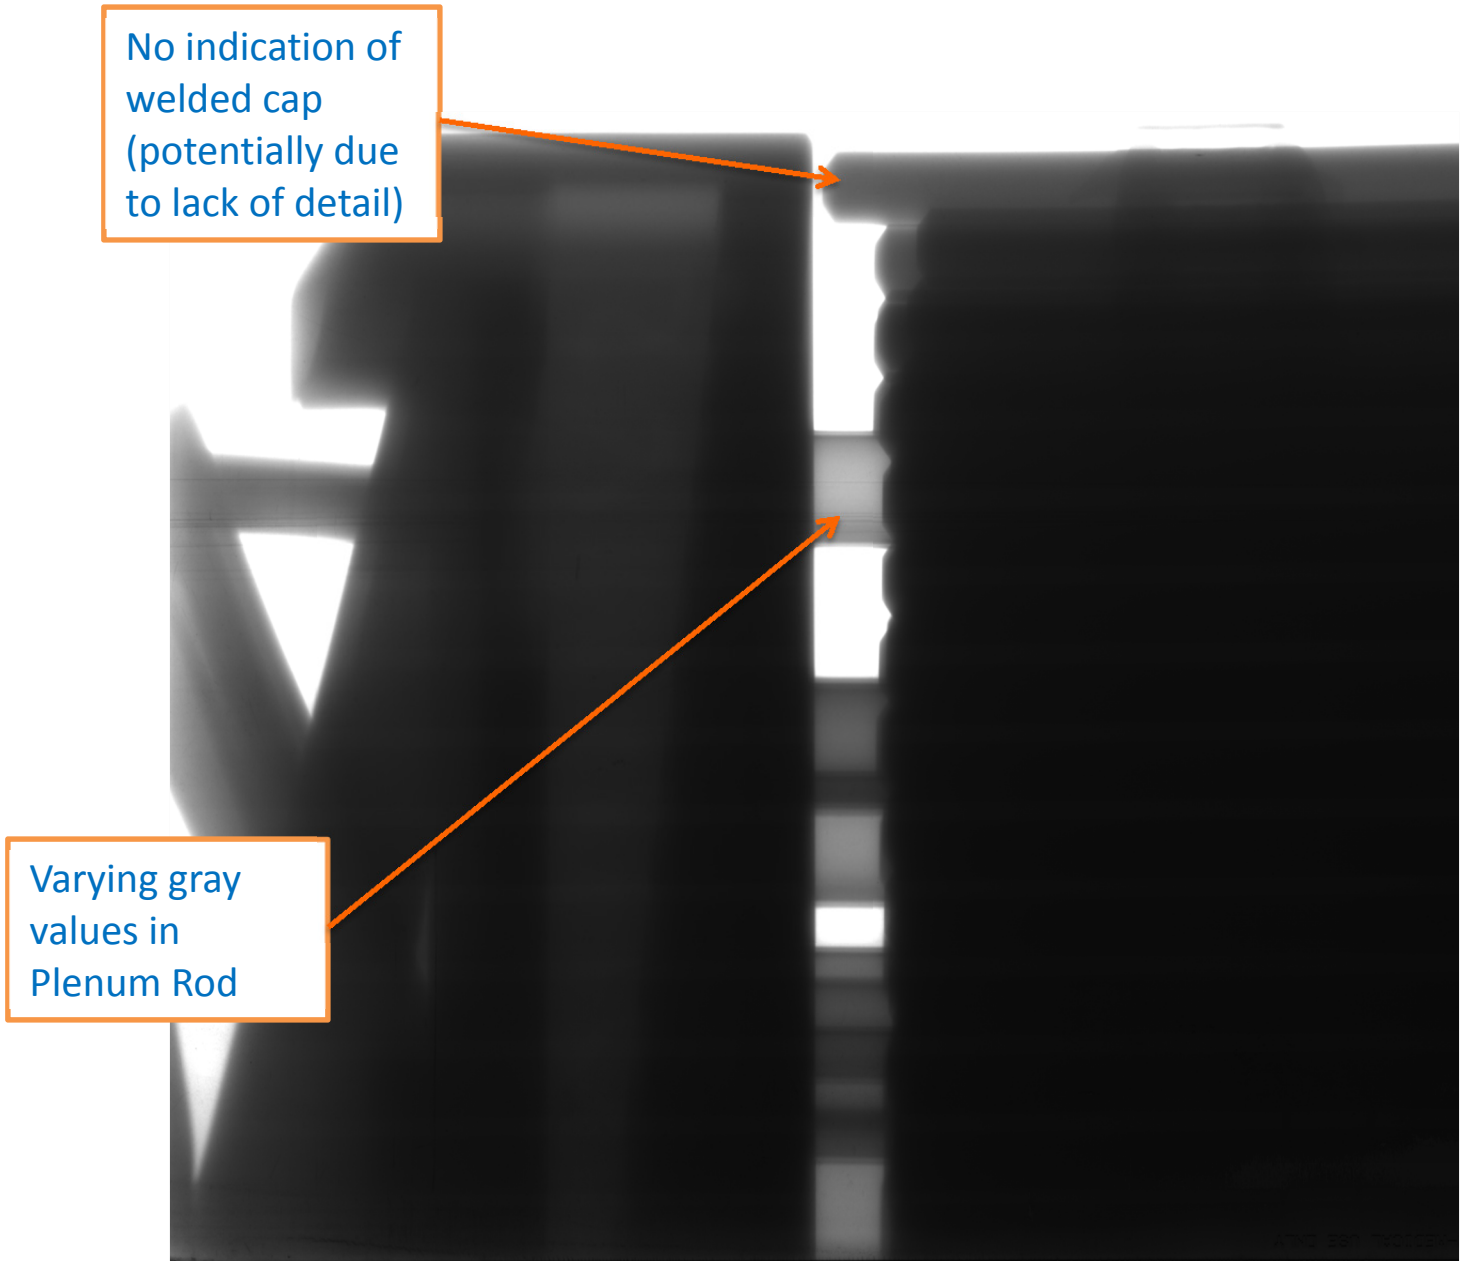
Additional bottom image of INL dummy fuel assembly showing threads in fuel rods and plenum tubes
